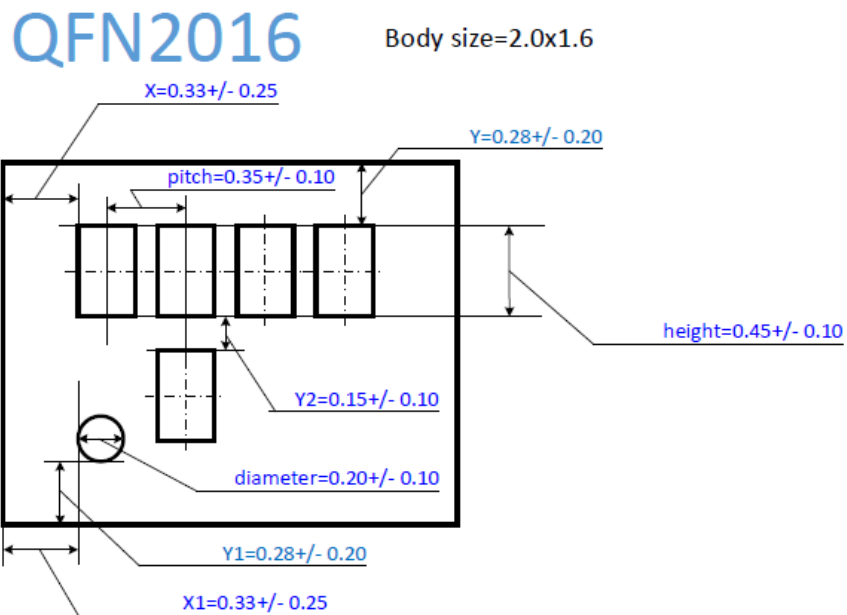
Standard Marking Dimensions for 2.0x1.6mm Package
